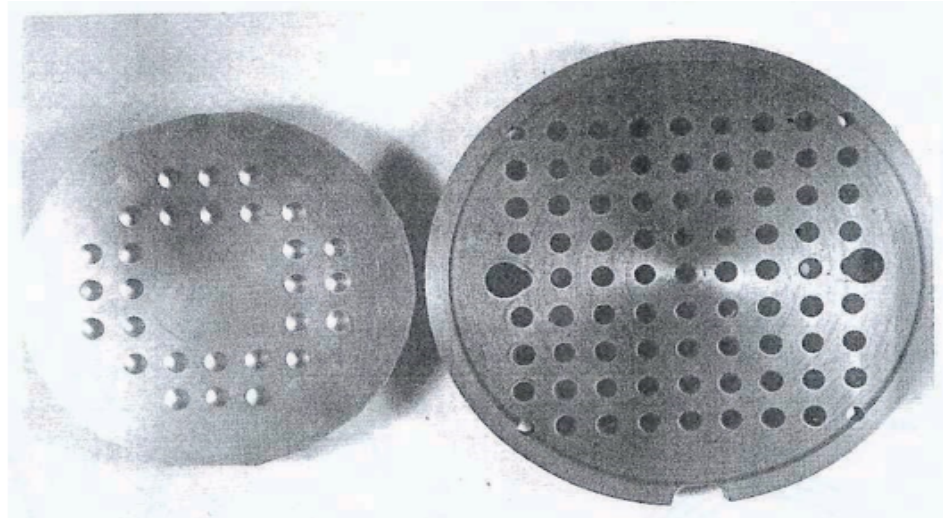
Deformed Work Piece with Forming Die and dimples [22]
